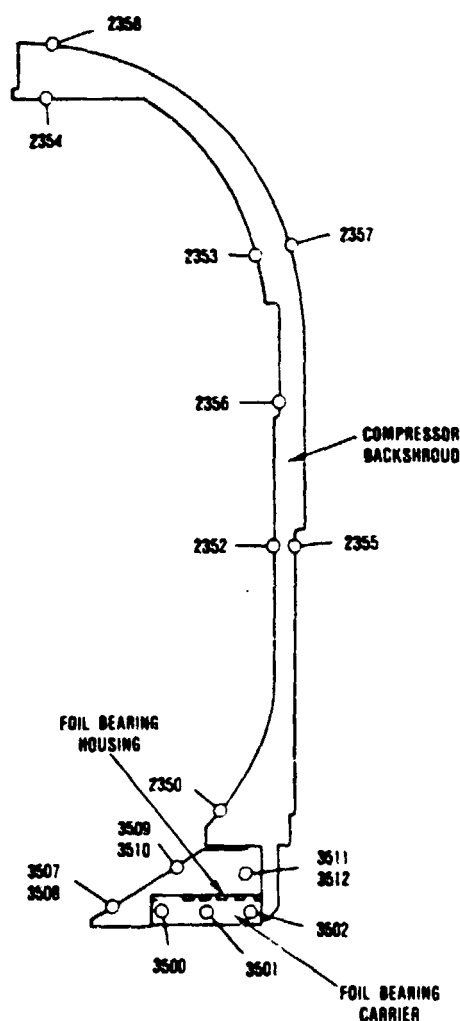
Foil Bearing Assembly/Structure Thermocouple Location.
